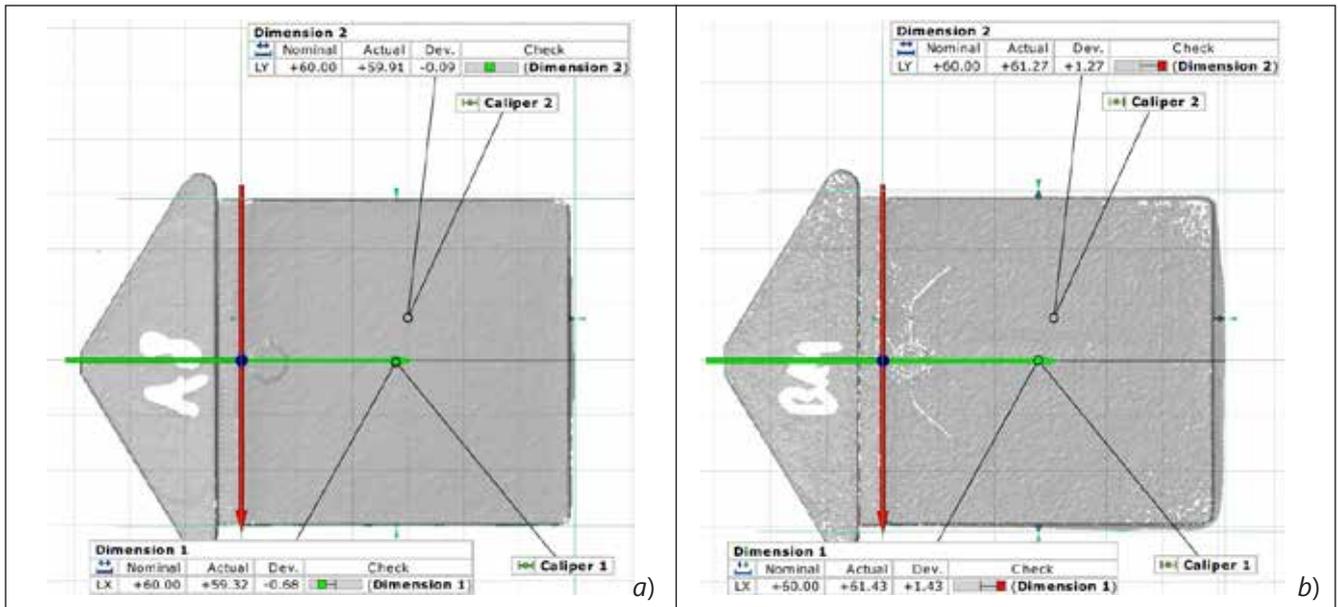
Scanned test specimens (a) specimen 8 produced on a new tool steel insert, (b) specimen 14 produced on a tool steel insert with visible signs of a macro-crack.
